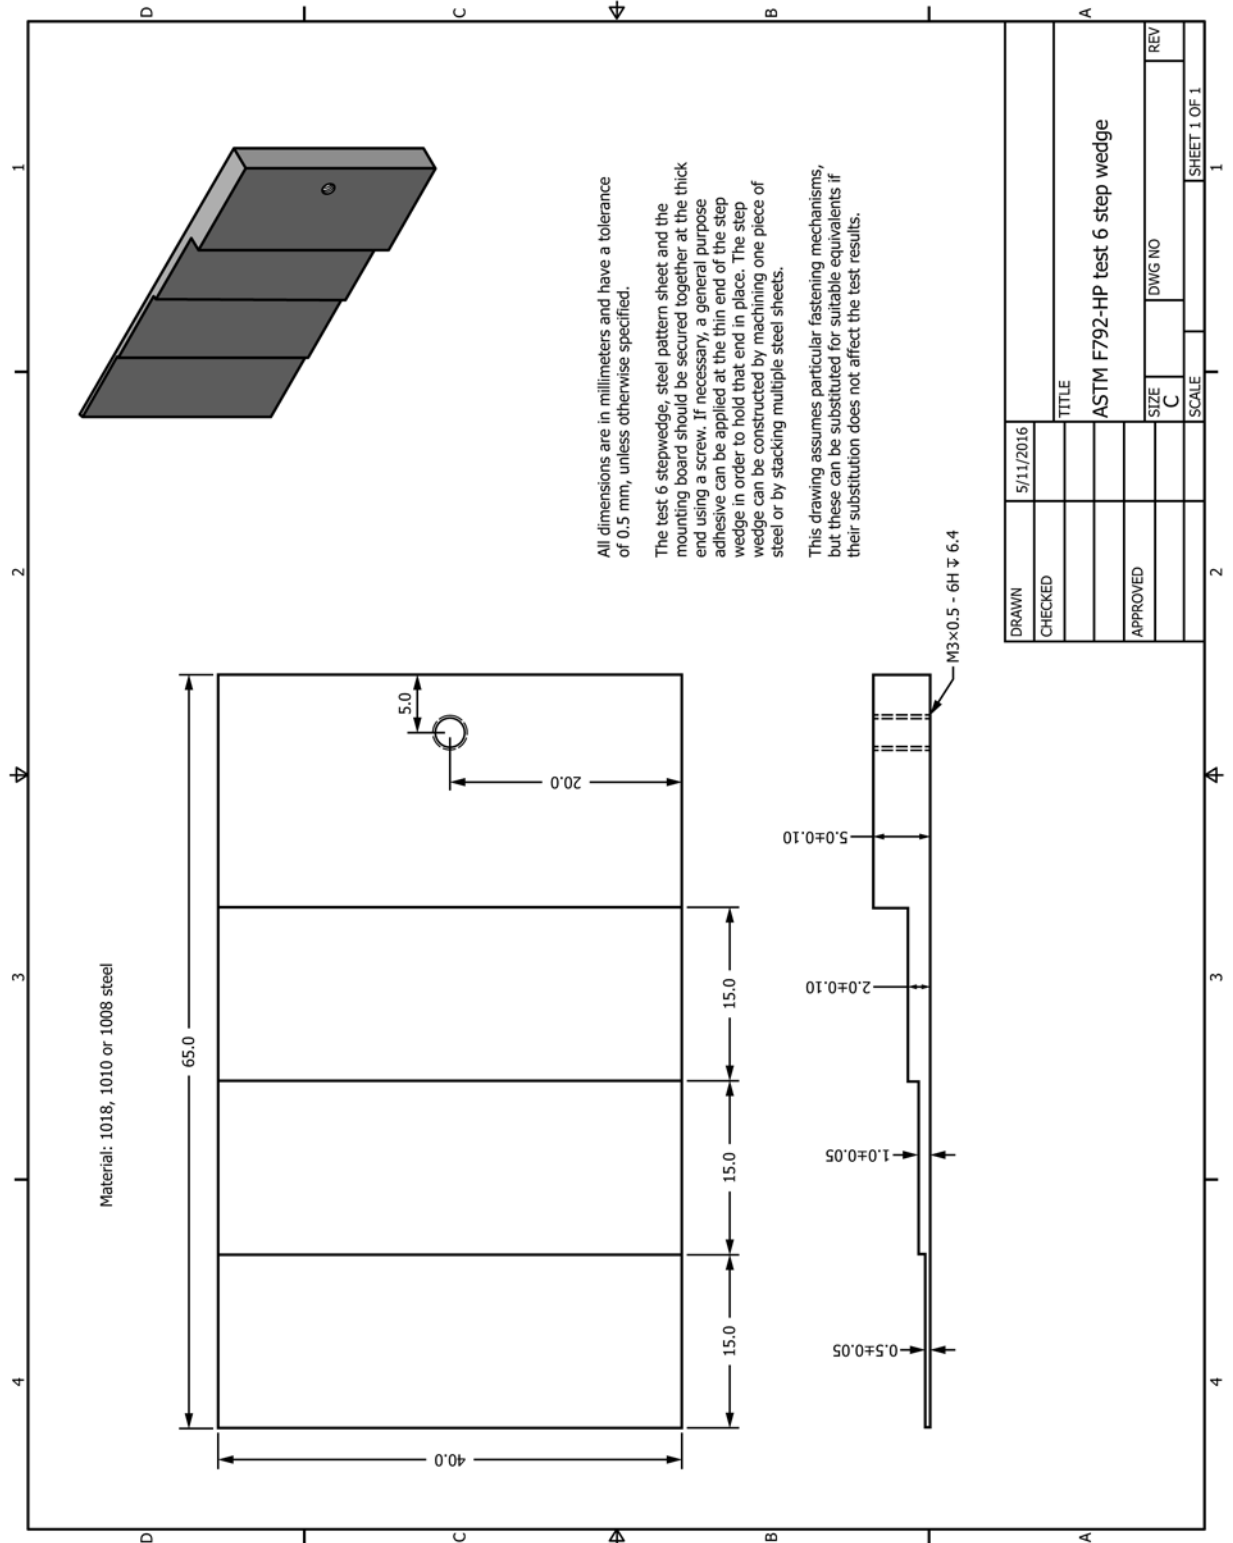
Practice F792 – HP Mechanical Drawing
